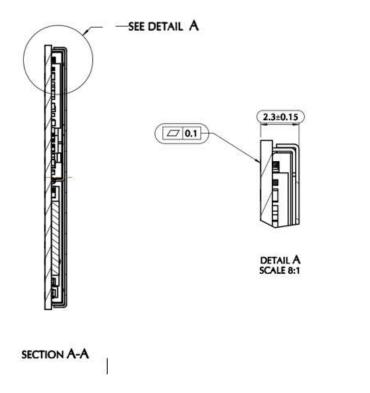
LE910C1-APX Mechanical Dimensions (Side view)
